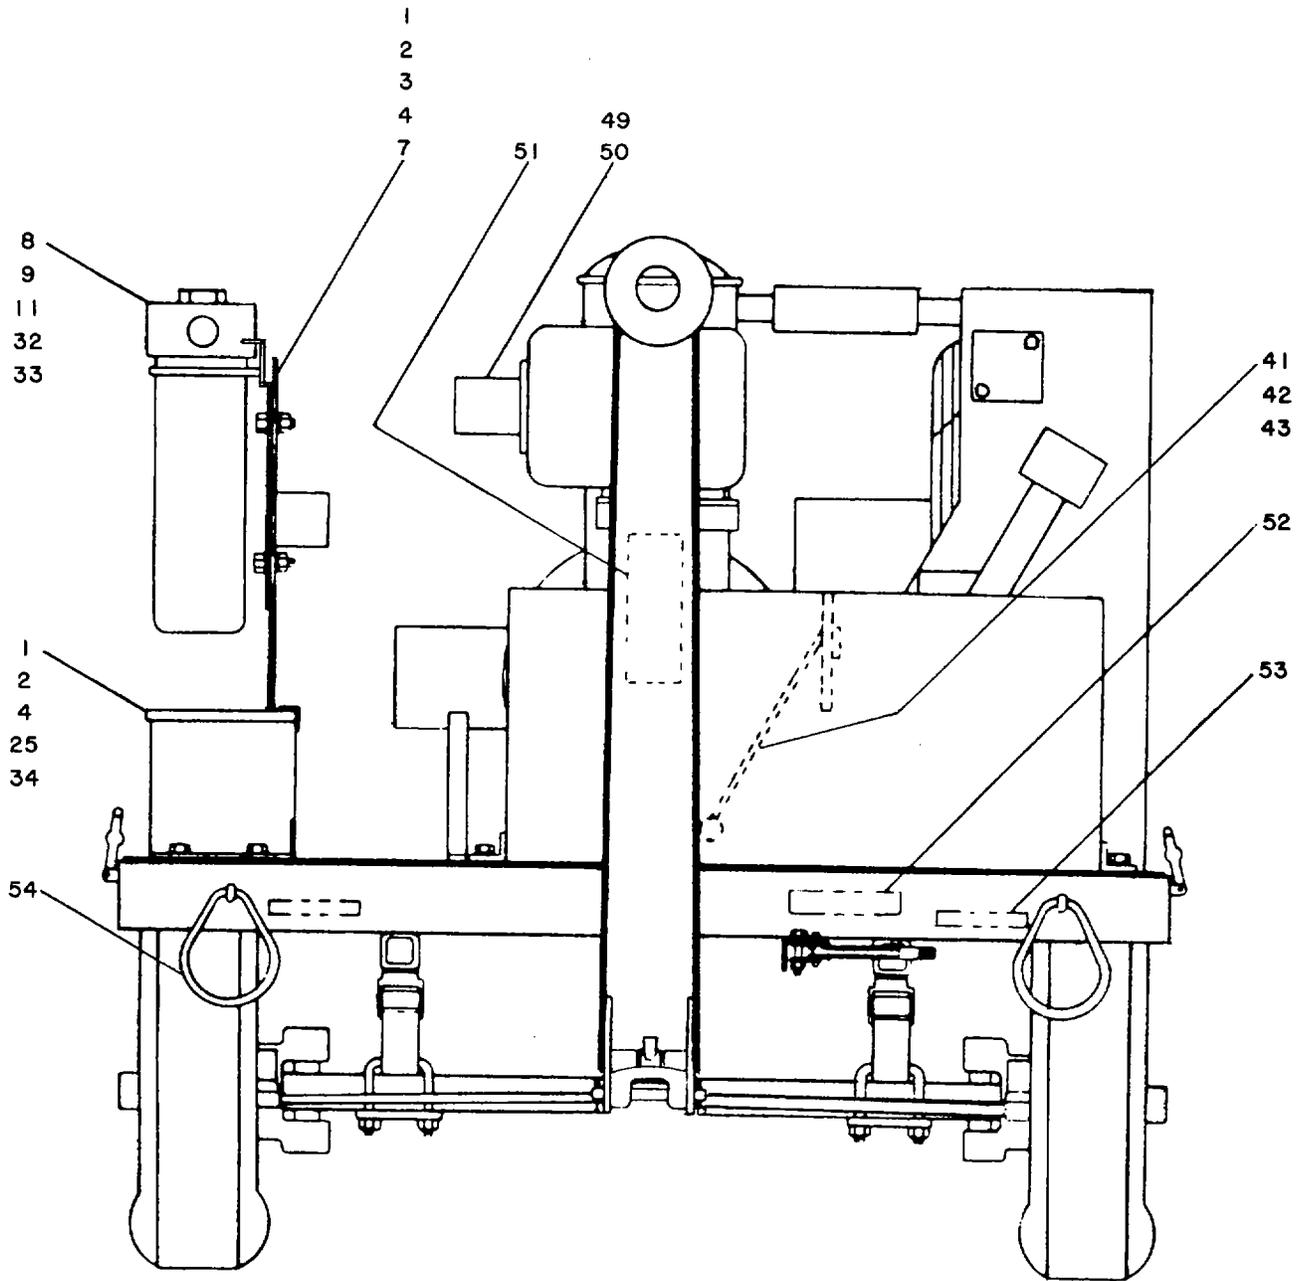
INTERNAL COMPONENTS ASSEMBLY
